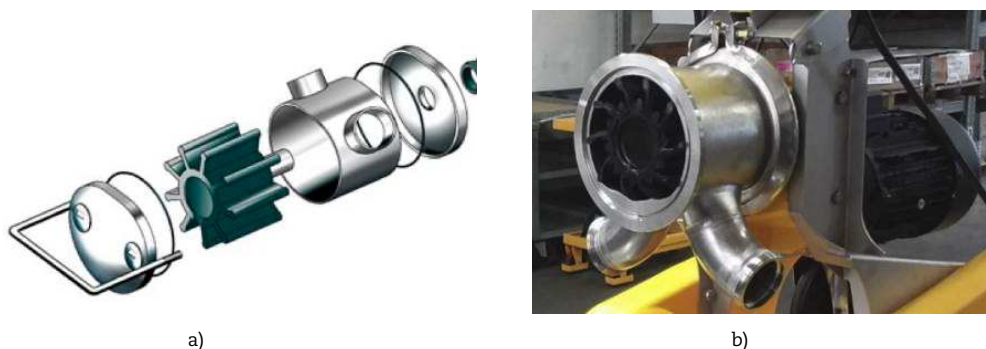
Flexible impeller pump: a) simplified exploded diagram; b) assembled system with deformed impeller.
